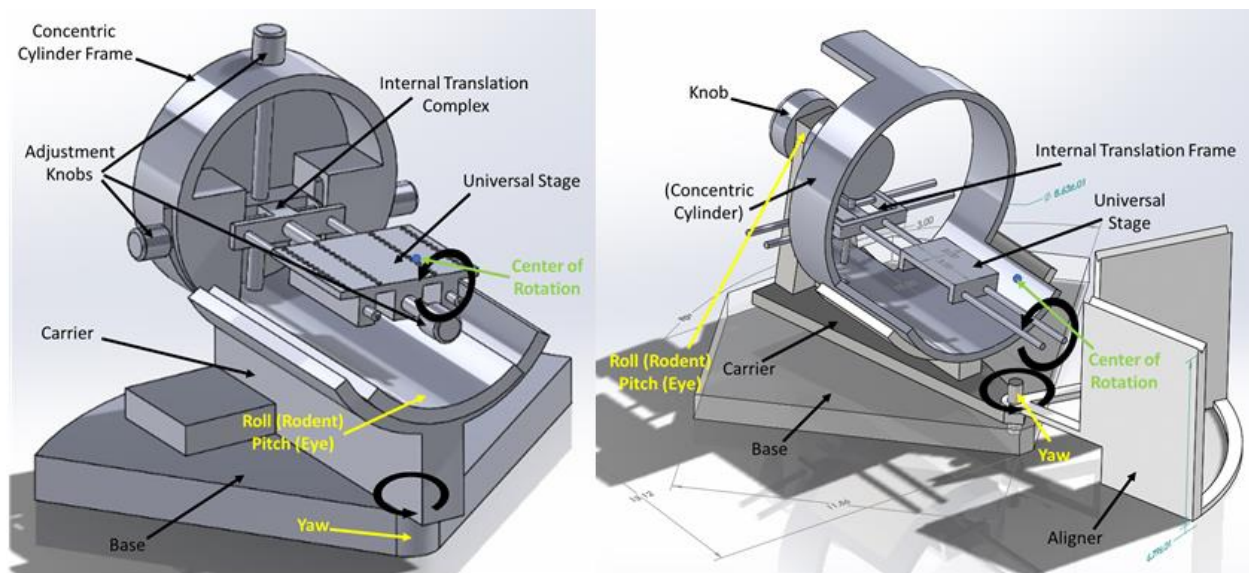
Dimensioned SolidWorks drawing of final prototype: Diamond RRaTS (right); design based on the selected Pizza Design (left); features 5 degrees of freedom: pitch of eye (roll of rodent) available via turning of the knob while yaw via pivoting carrier across base; three degrees of internal translation due to travelling along threaded rods of internal translation frame, held by friction; aligner allows user to position eye (via internal translation) at the intersection of two rotational axes
